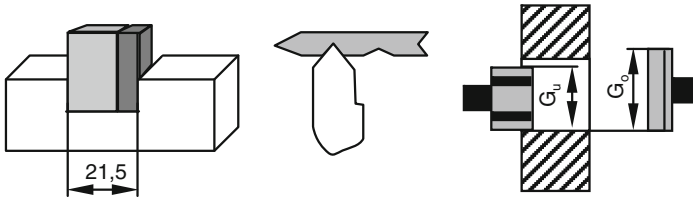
Types of gauges: inspection gauges, form gauges, limit gauges
